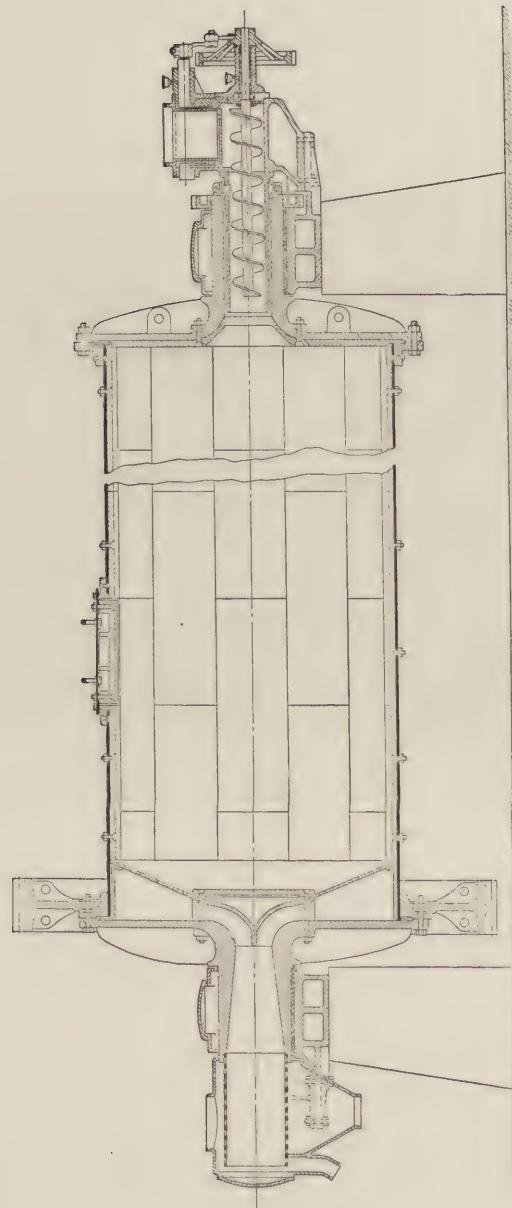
Section of standard tube mill, charge and material ground removed.
